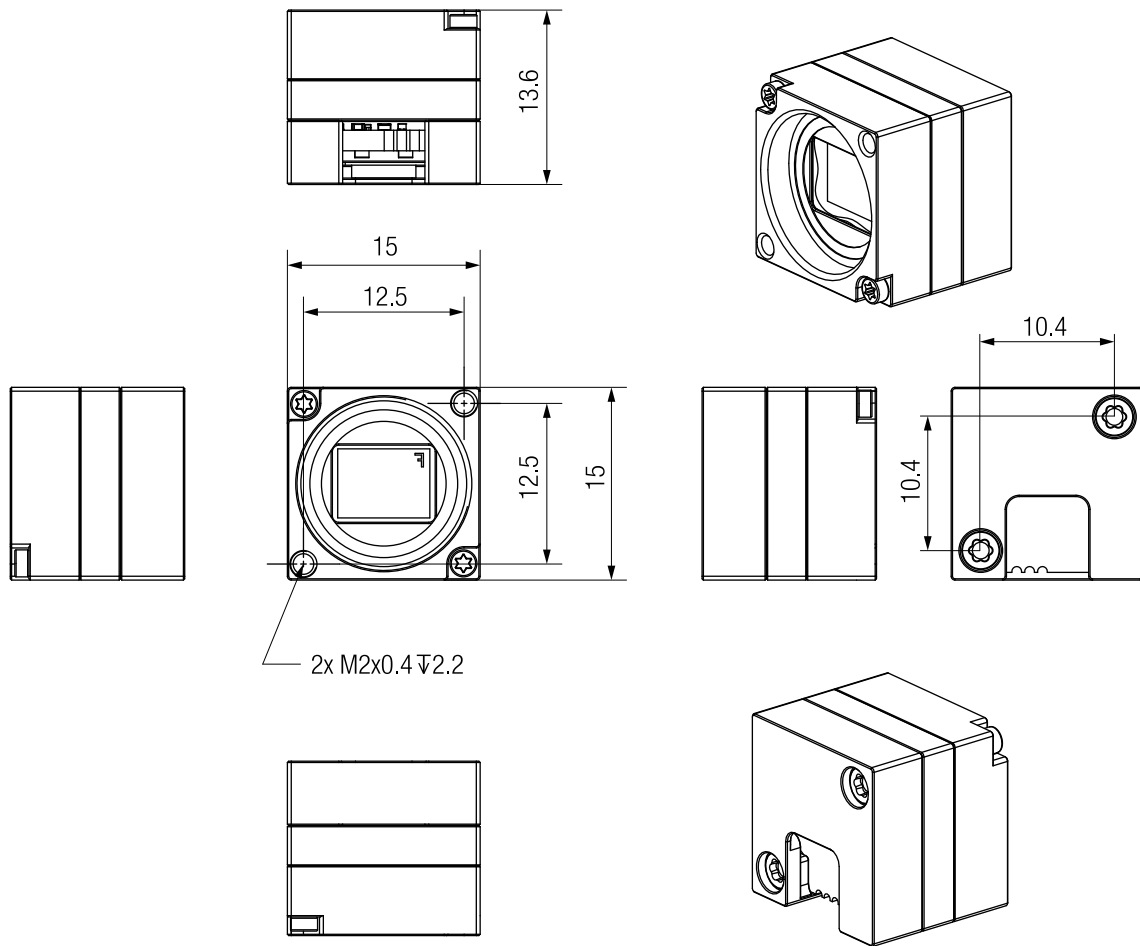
Dimensional drawing of MU196xR-ON with ADPT-MU-CX3-UC adapter
